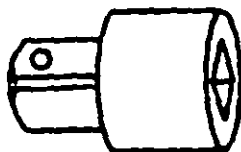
Type IV, class 5, style A attachments, adapter, socket wrench.
